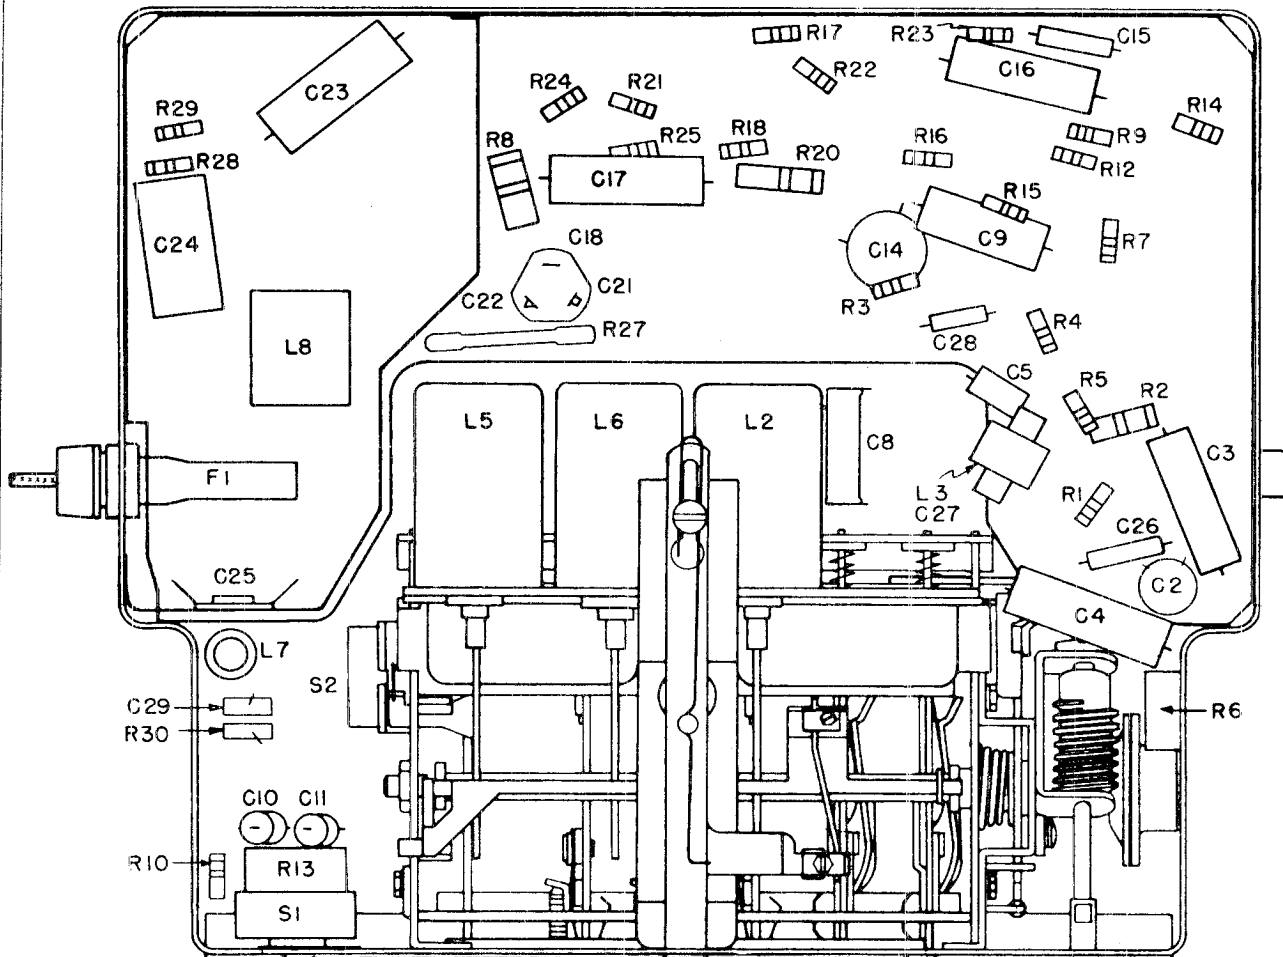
PARTS LAYOUT - TOP OF CHASSIS
